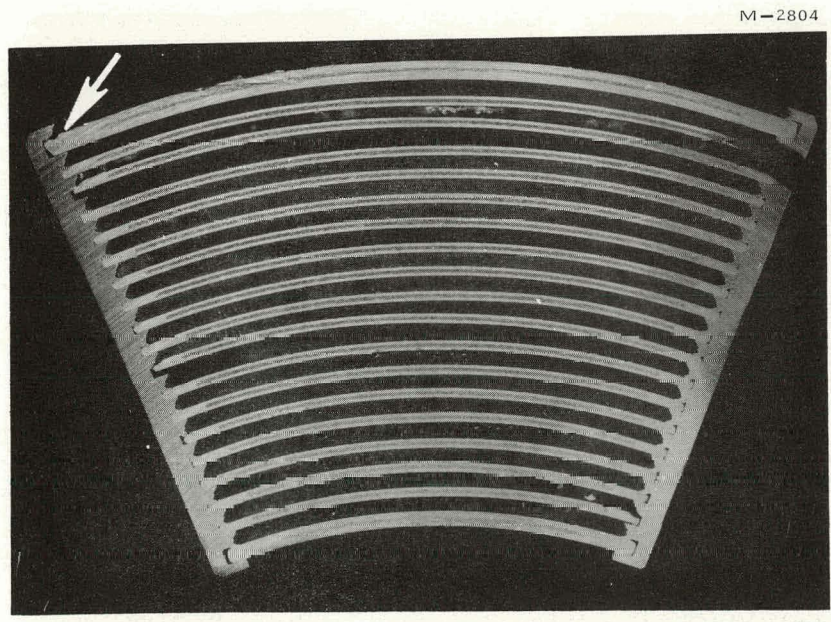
Convex side of a roll-swaged element showing swaging groove failure on plate 19.
